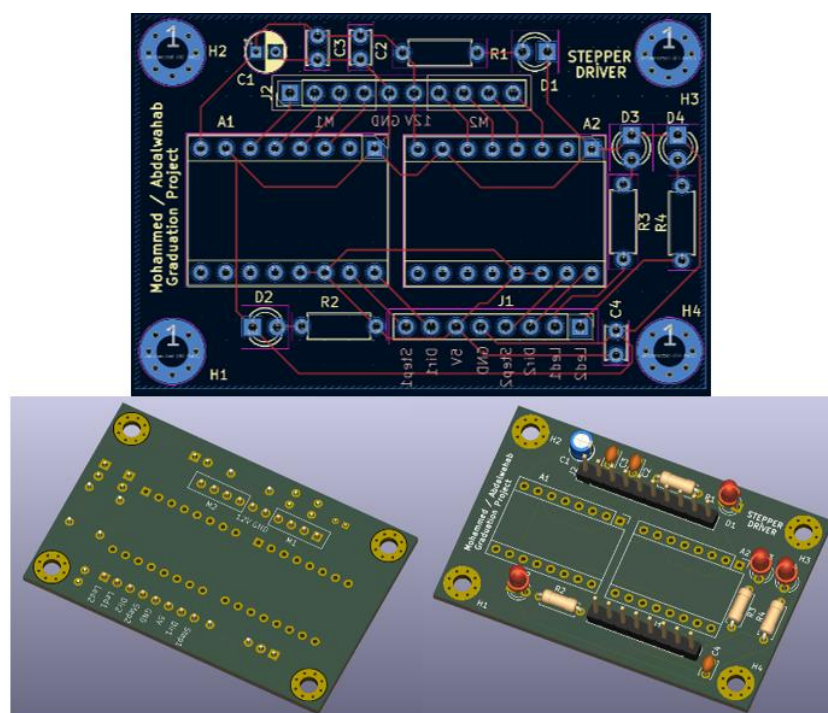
PCB Layer and 3D Model of the Designed Circuit in the Electronics Section
